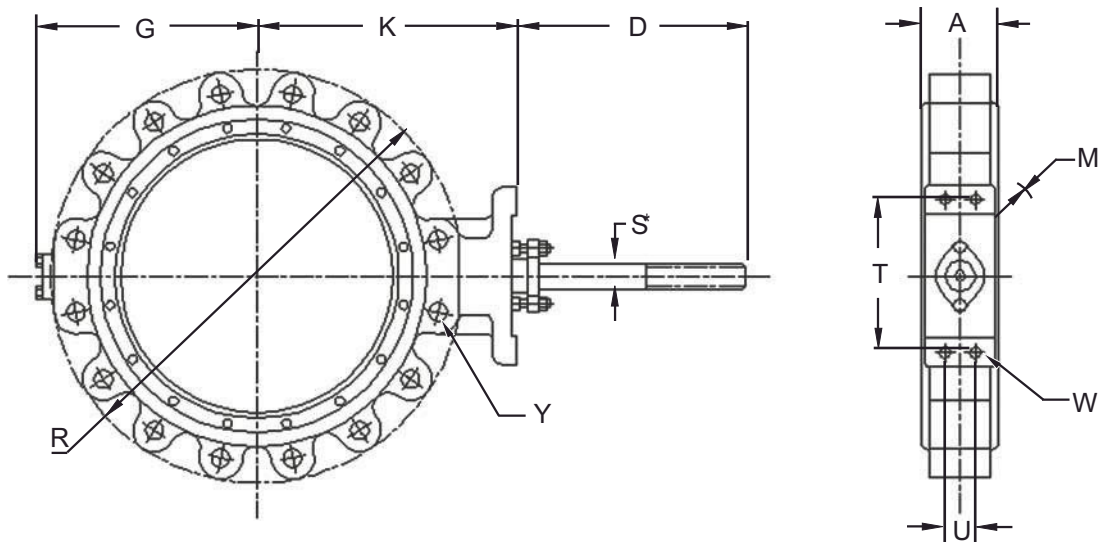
Dimension and Weight for Type 8502 Class 150 Single Flange Mounted Control Valve (Also available in Table 4)
